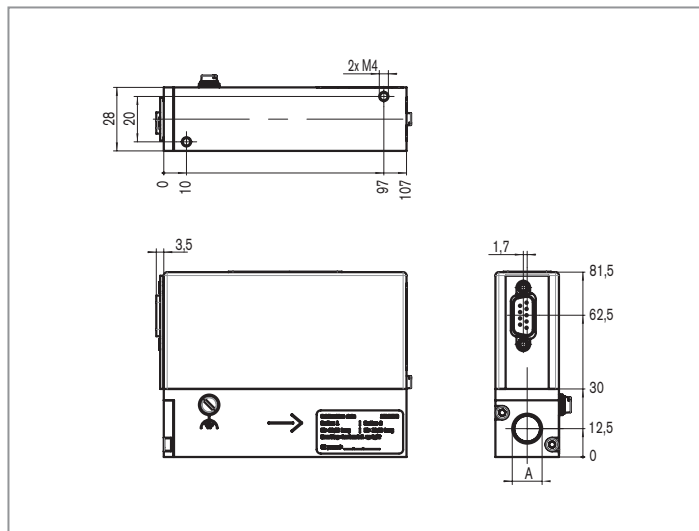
Dimensions of MFM types 8703 and 8705 and MFC types 8713 and 8715
